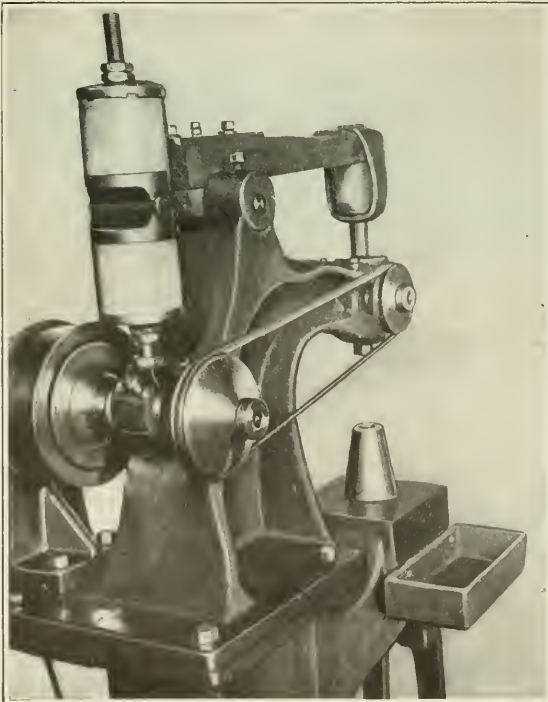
Close View of Opposite Side of High-speed Riveting Machine
